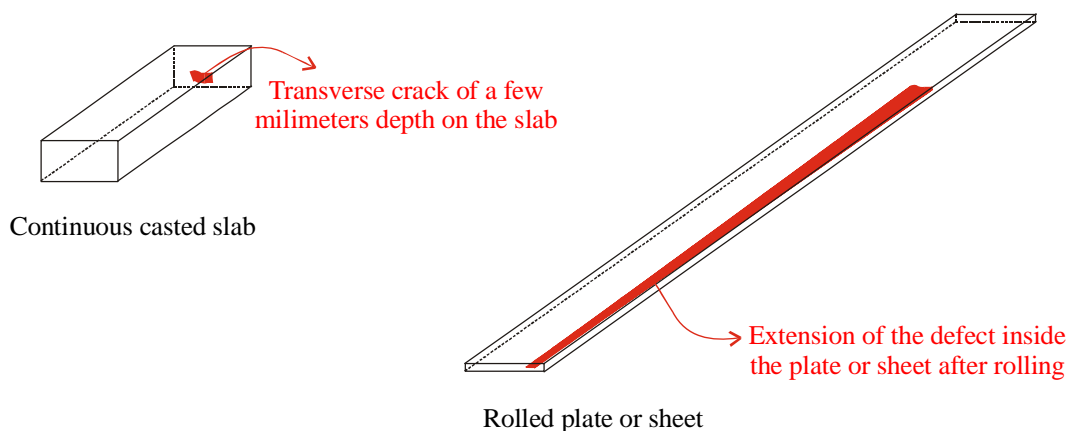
Types of cracks in continuous casting.
